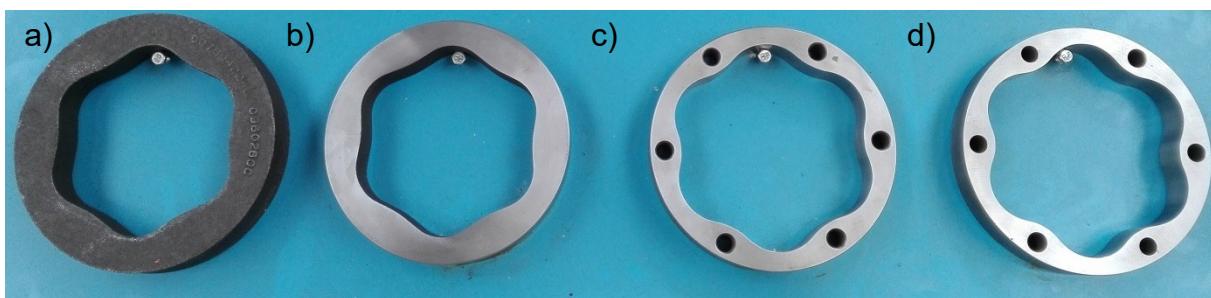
a) The bought semi-product, b) work-piece after turning operations, c) work-piece after milling operations, d) work-piece after finishing operations.
